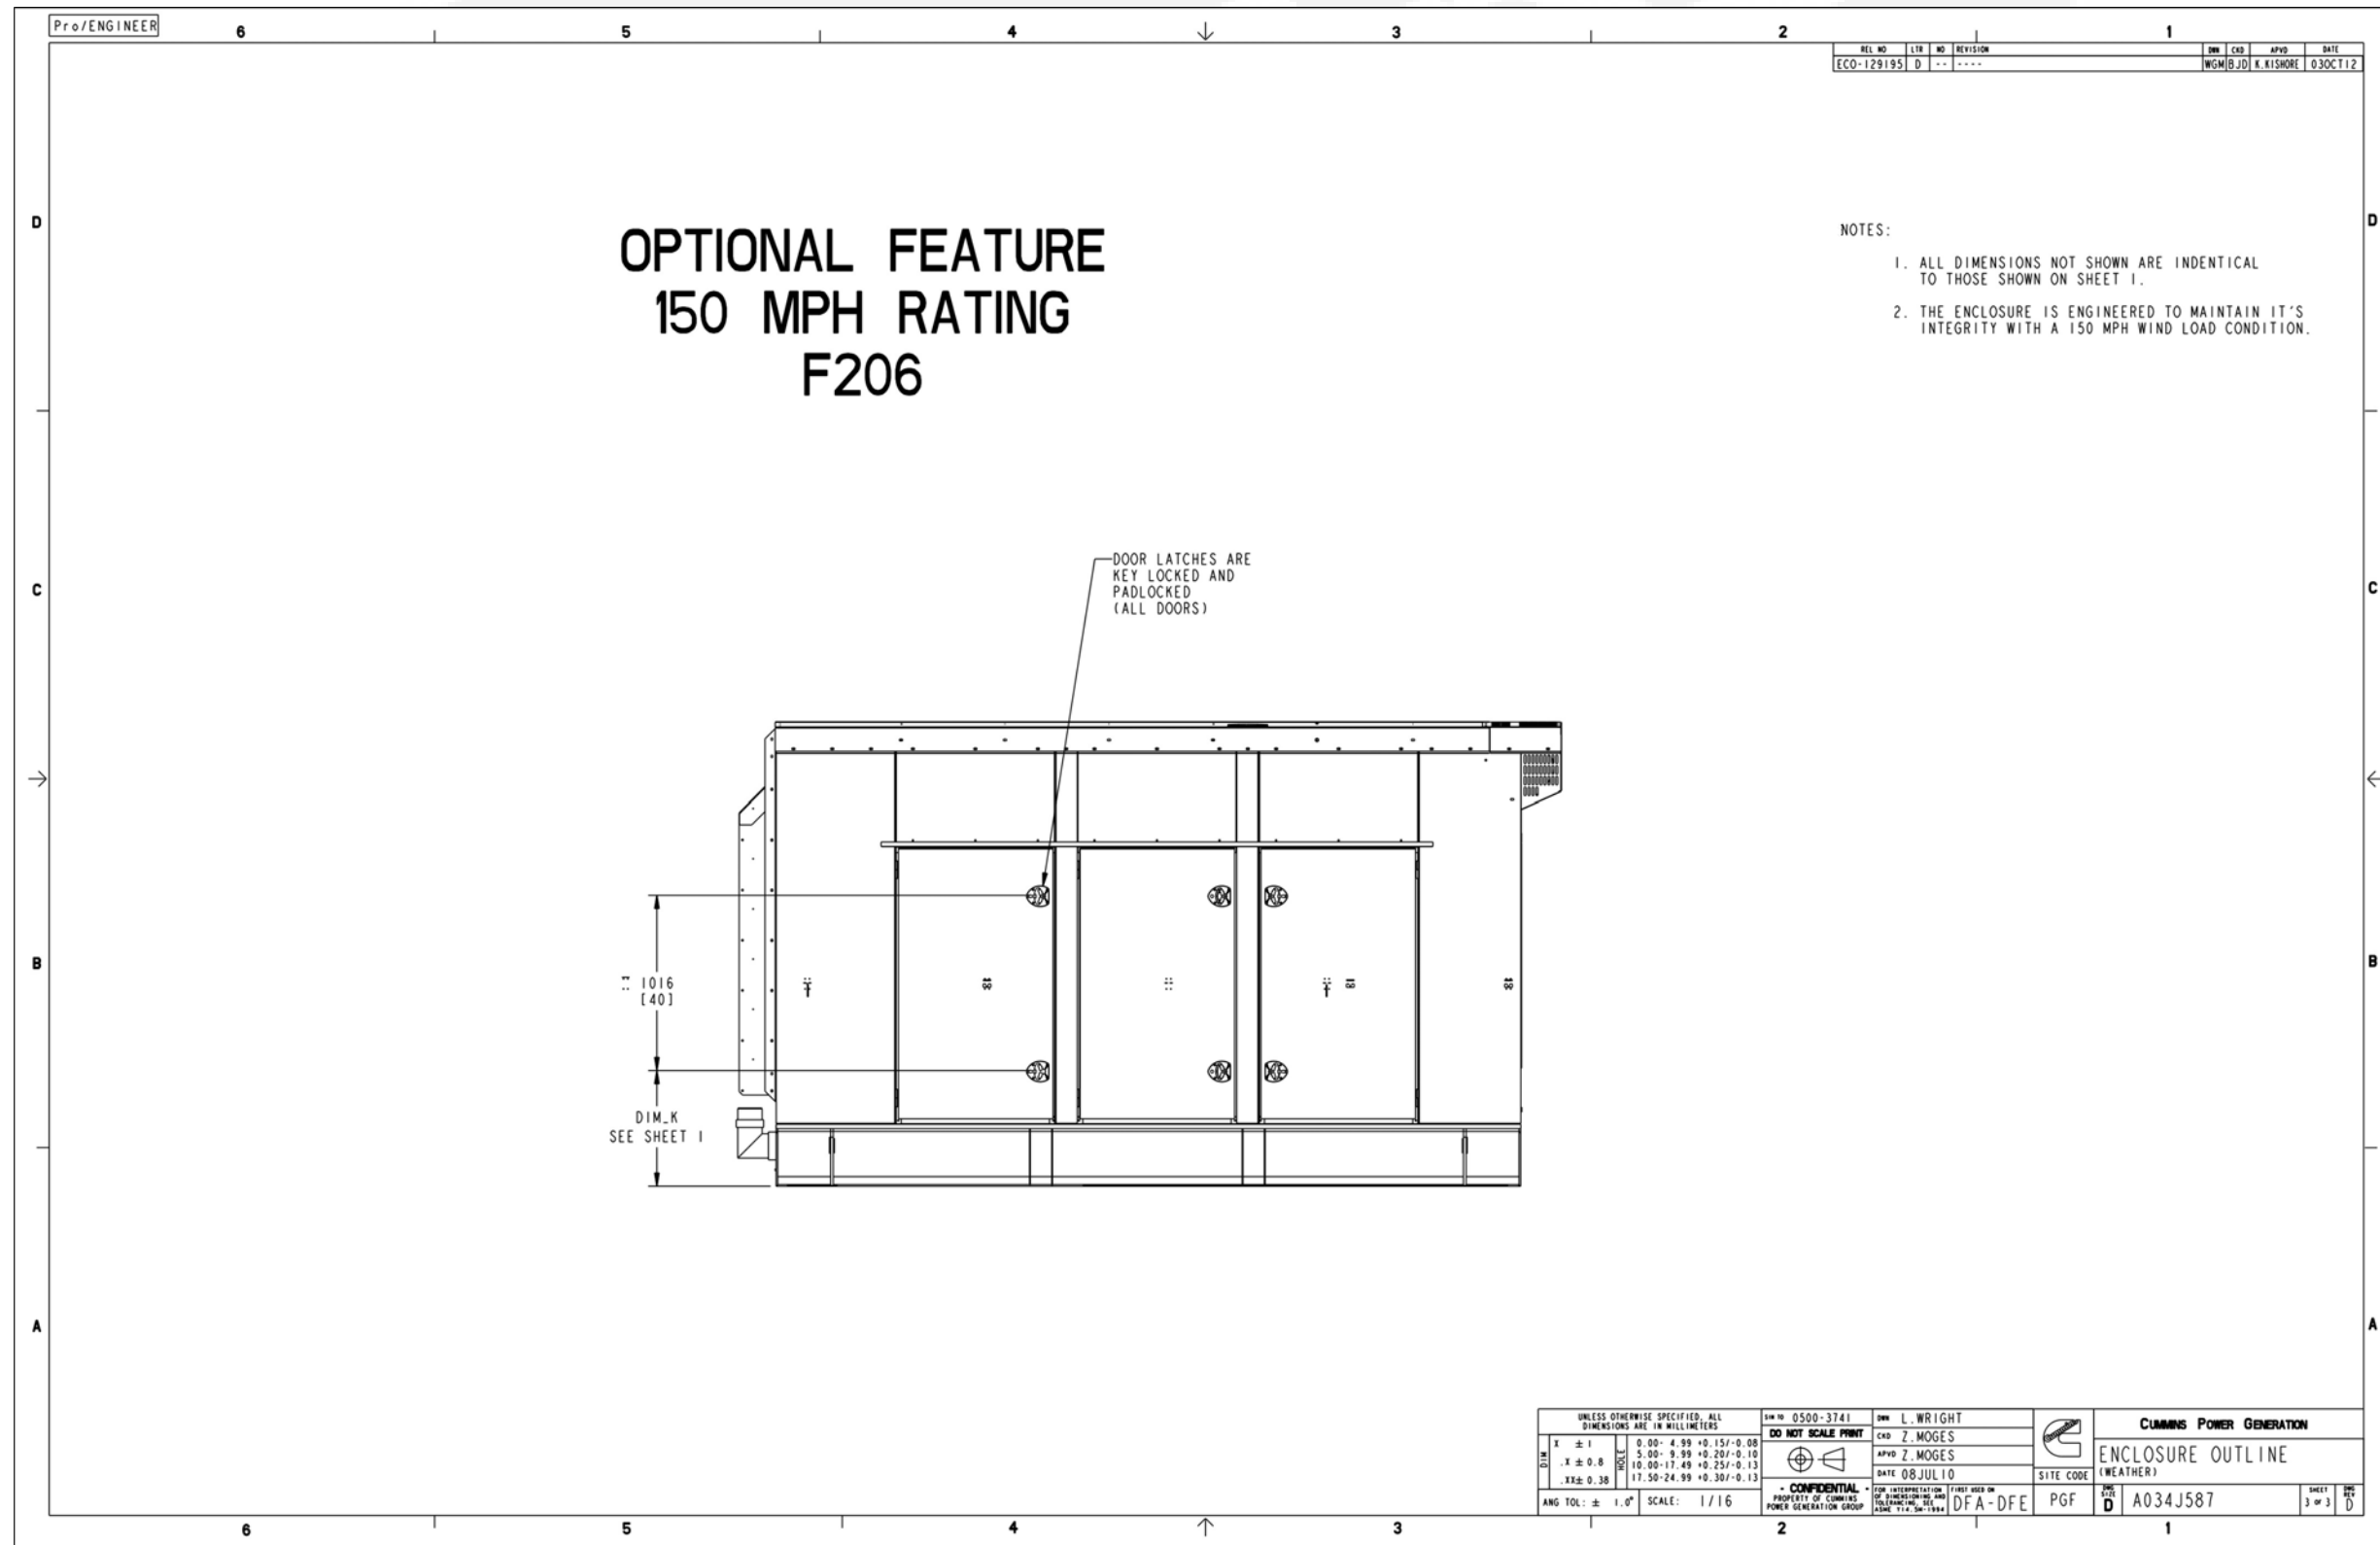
ENCLOSURE OUTLINE DRAWING (WEATHER) (SHEET 3)
